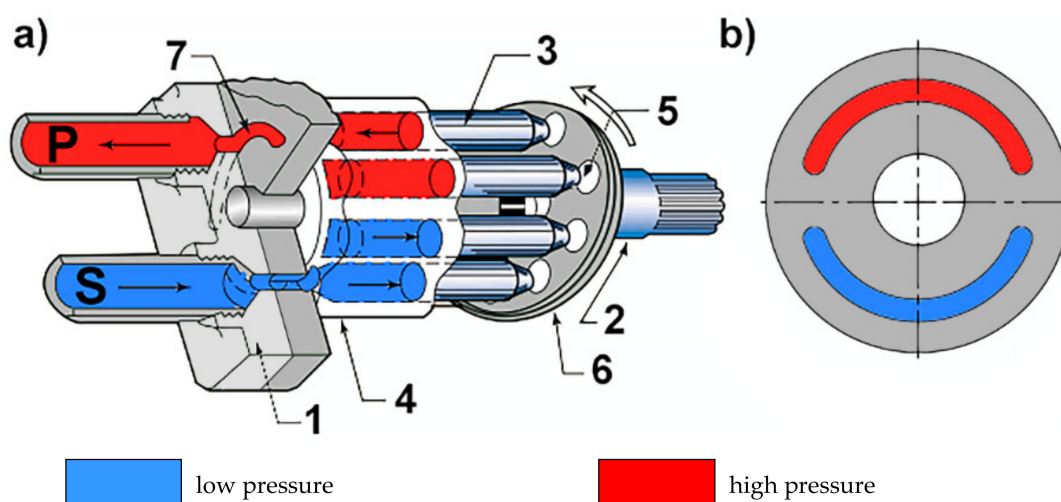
Axial piston pump with plate commutation unit [12]: (a) cross-section of the pump; (b) commutation plate; P—high-pressure pumping channel; S—low-pressure suction channel; 1—manifold; 2—shaft; 3—piston; 4—cylinder block; 5—slipper; 6—swashplate; 7—commutation plate.
